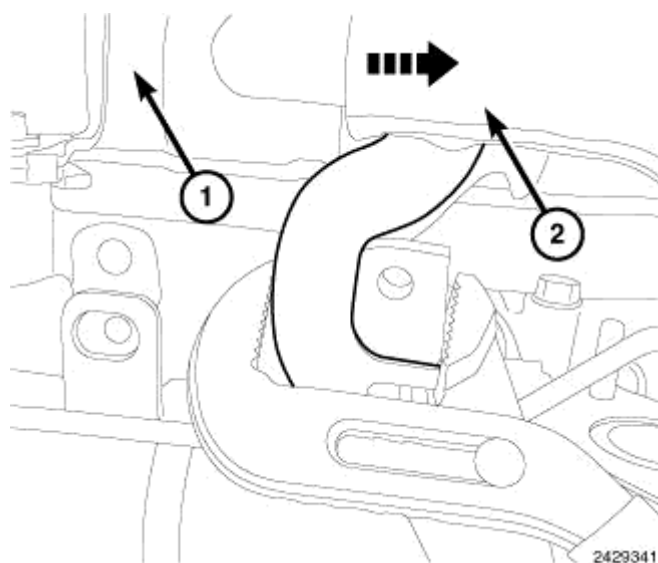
EGR Cooler, Clamp, Exhaust Transfer Manifold & Nuts
